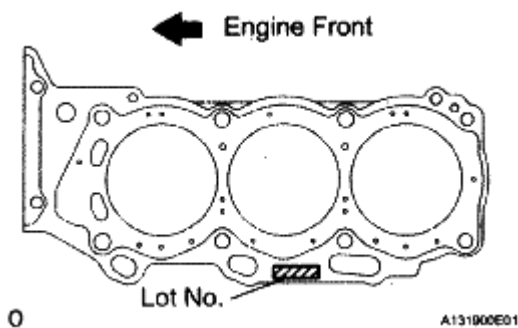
Placing Cylinder Head Gasket On Cylinder Block Surface With Lot No. Stamp Upward
